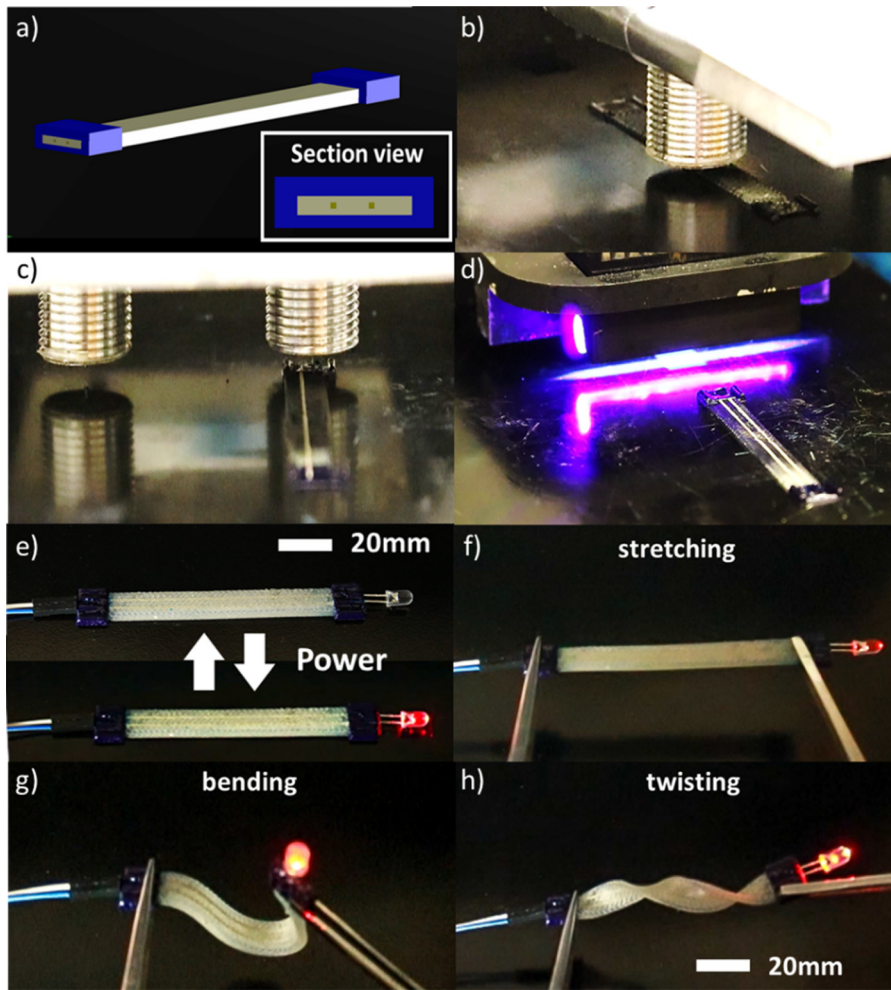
a) Schematic of the stretchable light ribbon with a section view showing the blue inkjet casing, the gray stretchable elastomer, and the silver conductive lines. b) The first layer of elastomer being DIW printed between the two inkjet printed ends of the light ribbon. c) DIW printing of the conductive lines. d) Inkjet printing to encase the light ribbon's electrical lines and provide rigid support for the electrical components. e) The as-printed stretchable light ribbon with the LED and a power source plugged in to illuminate the LED. f) Stretching, g) bending, and h) twisting of the LED light ribbon while the LED stays illuminated. (For interpretation of the references to colour in this figure legend, the reader is referred to the web version of this article).
